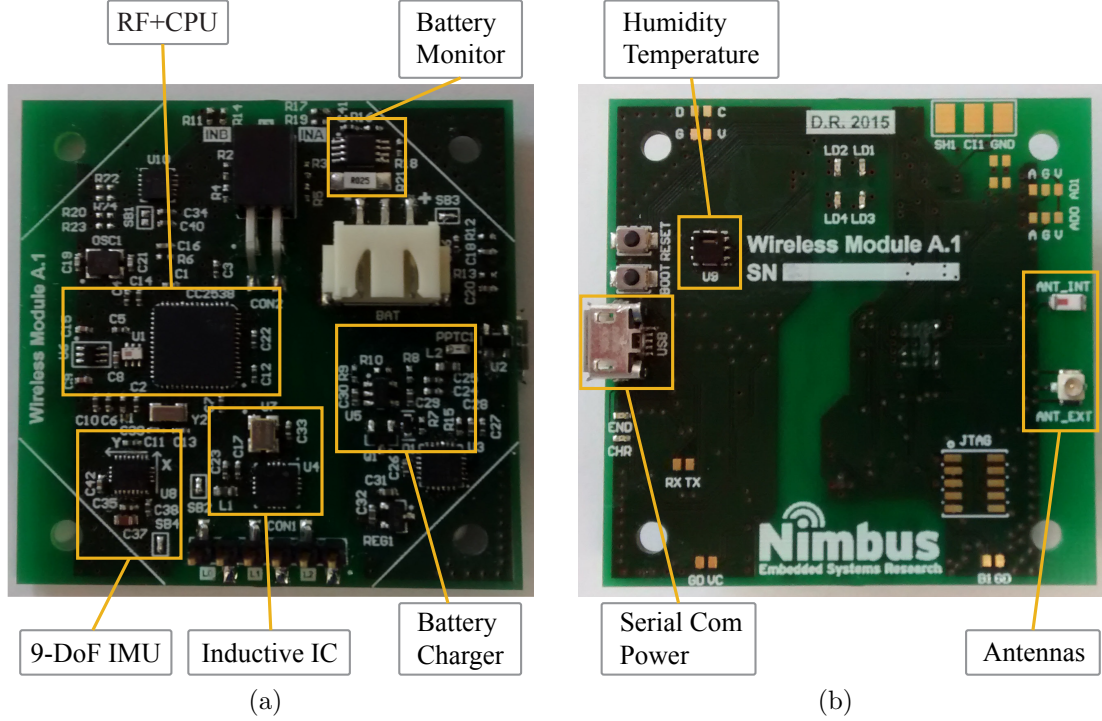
(a) Top layer PCB (internal side) (b) Bottom later PCB (external side)
